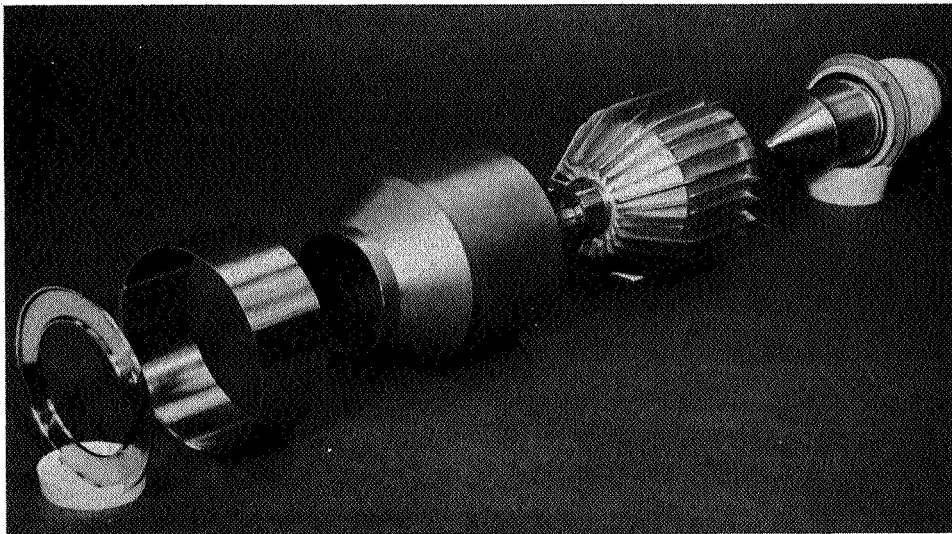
Assembly parts of compact dielectric heat pipe with gas reservoir.
